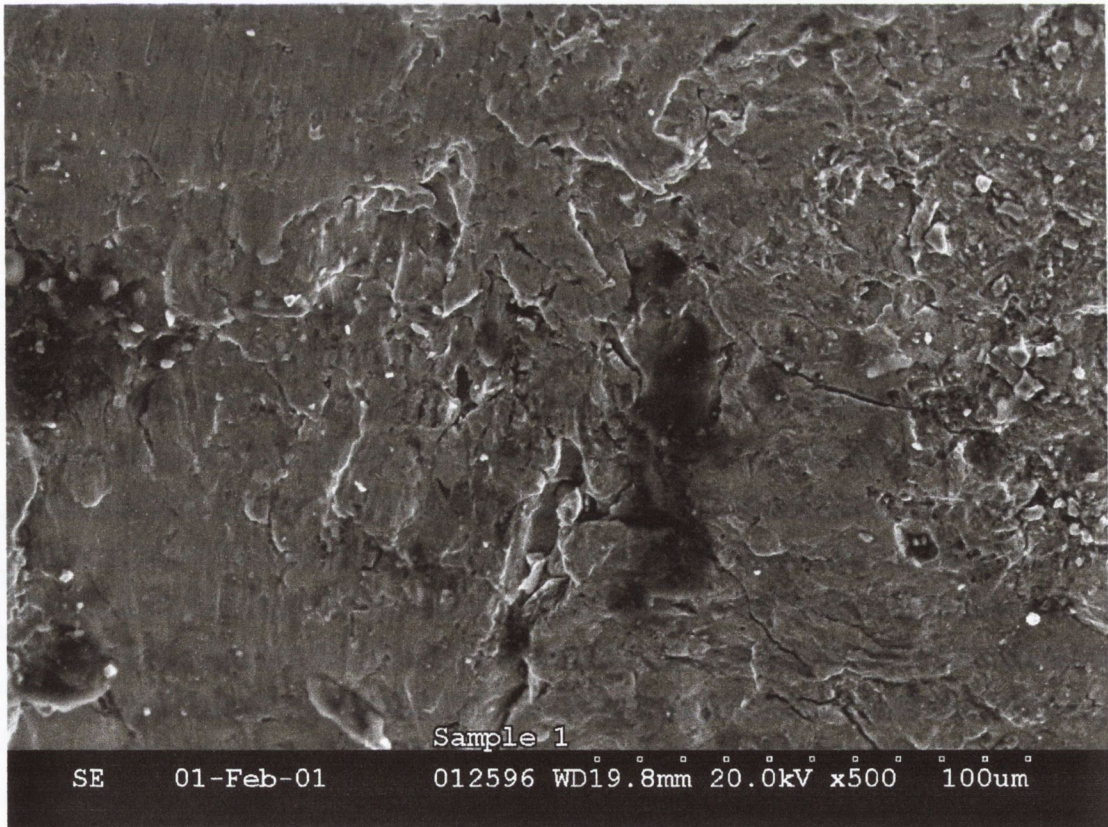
First crack-and-open specimen - showing zone A
